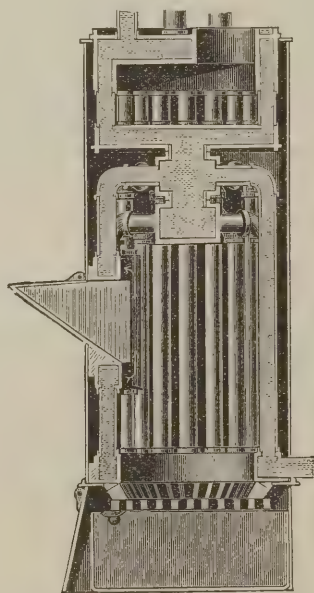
Sectional View of the Duplex Crown Hot-Water Boiler.
